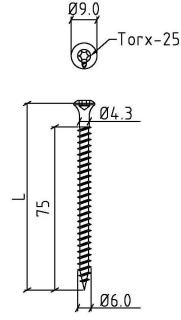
LBS 6.0 Screw for light weight concrete and wooden substrates
